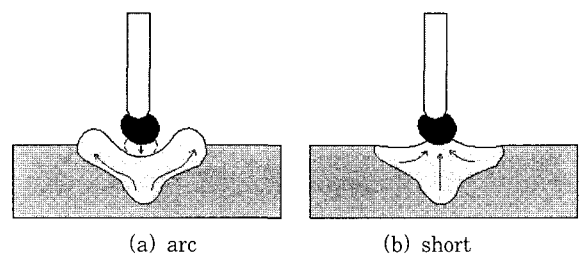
Schematic diagram of short circuiting mechanism by the weld pool oscillation
